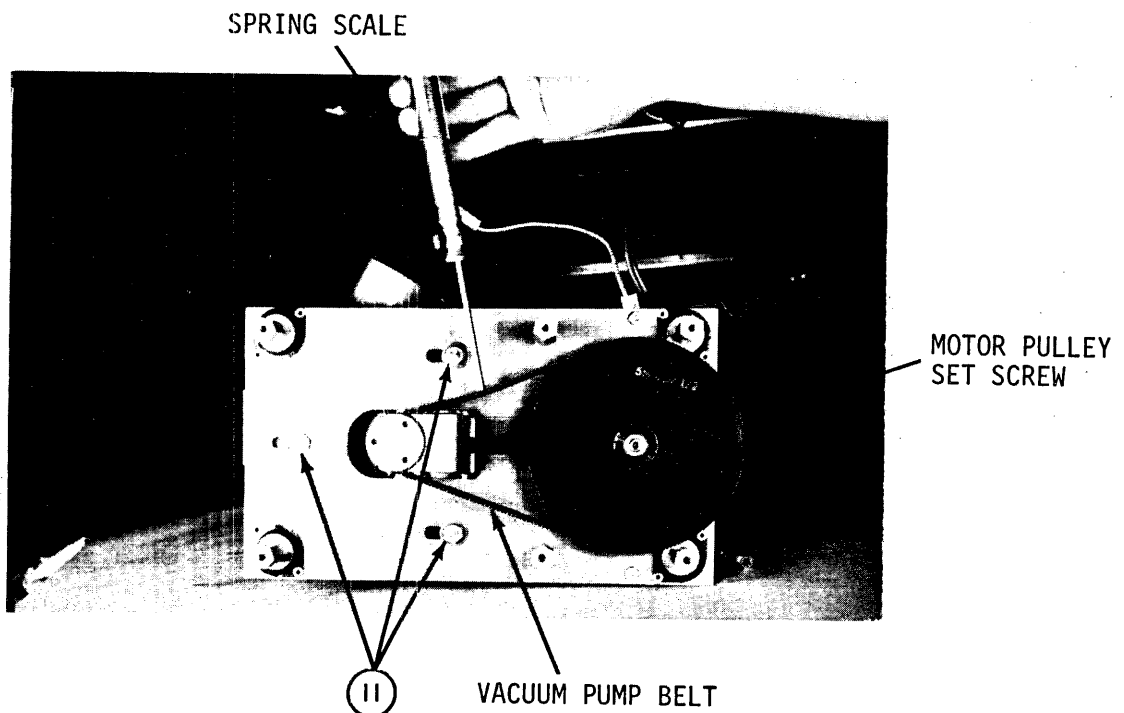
Adjustment of Vacuum Blower Motor Belt Tension
